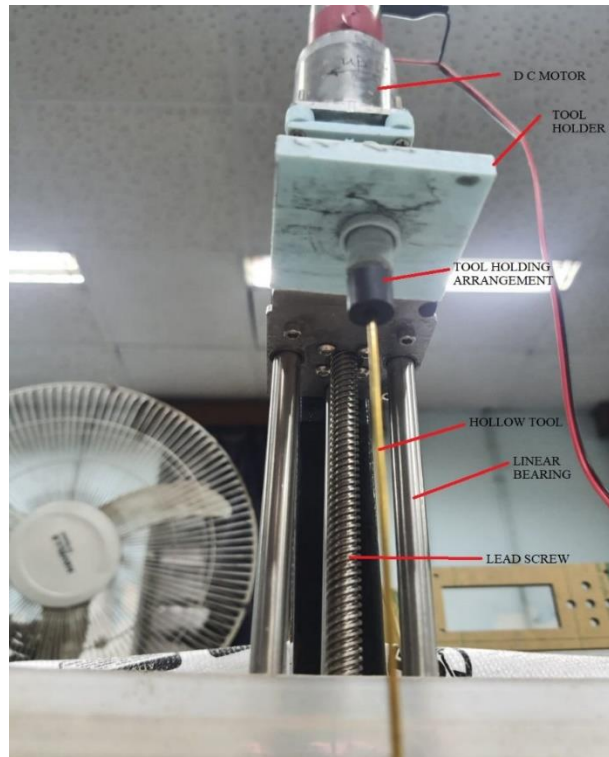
(1) STRUCTURAL Z AXIS DRIVE ASSEMBLY
